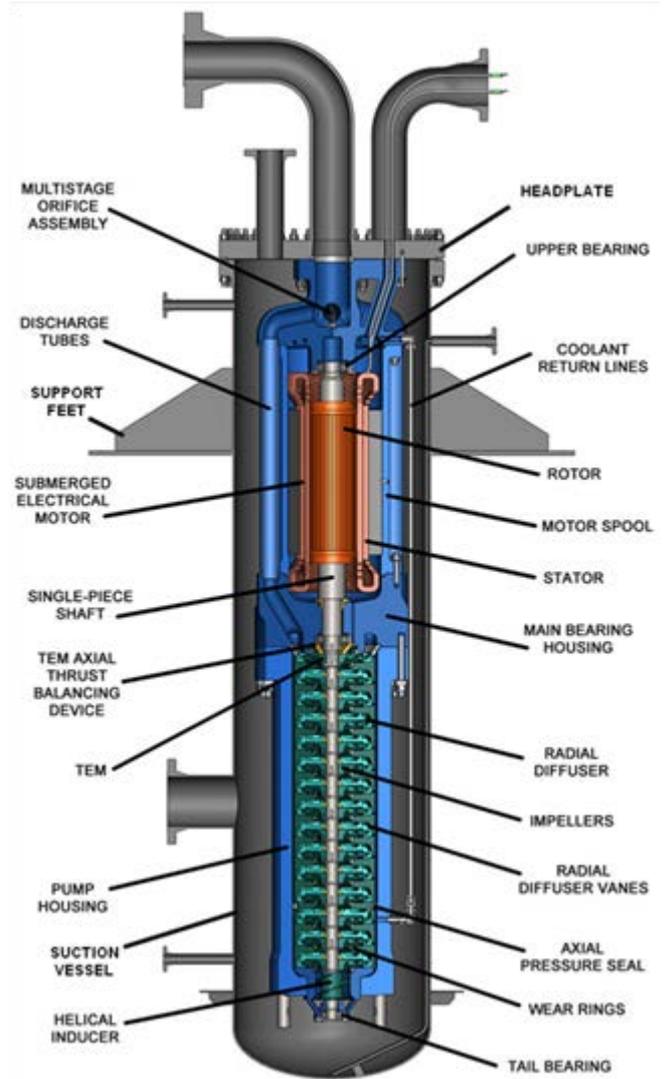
Cross Sectional View of Typical Suction Vessel Mounted High Pressure Pump.
